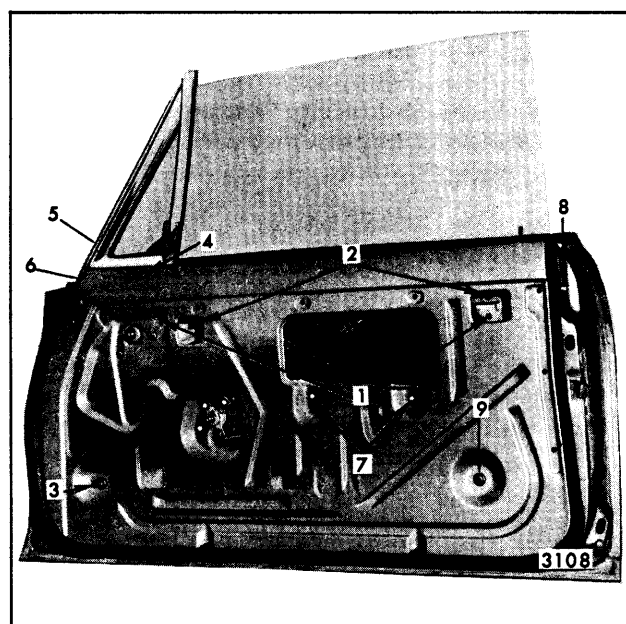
Door Window Removal and Adjustment - "Z" Styles
